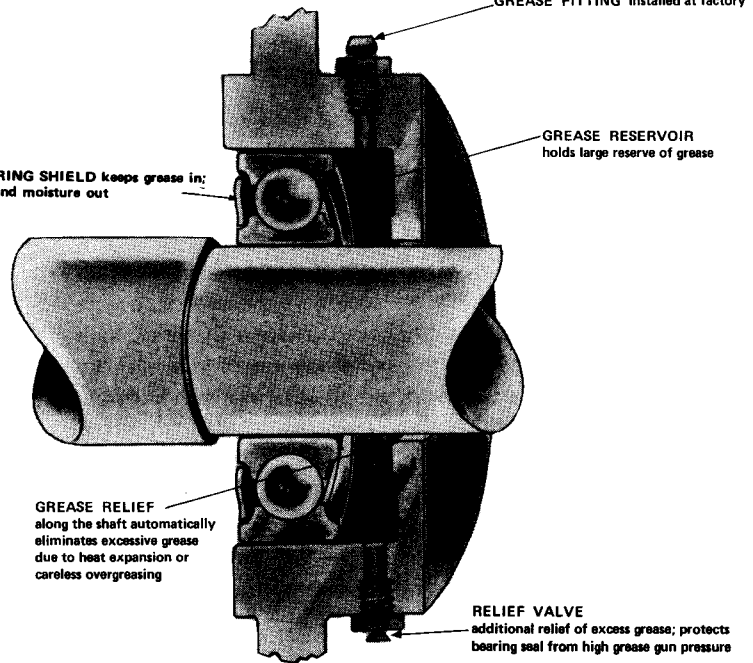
TYPICAL REGREASABLE BEARING AND BEARING HOUSING CONSTRUCTION
